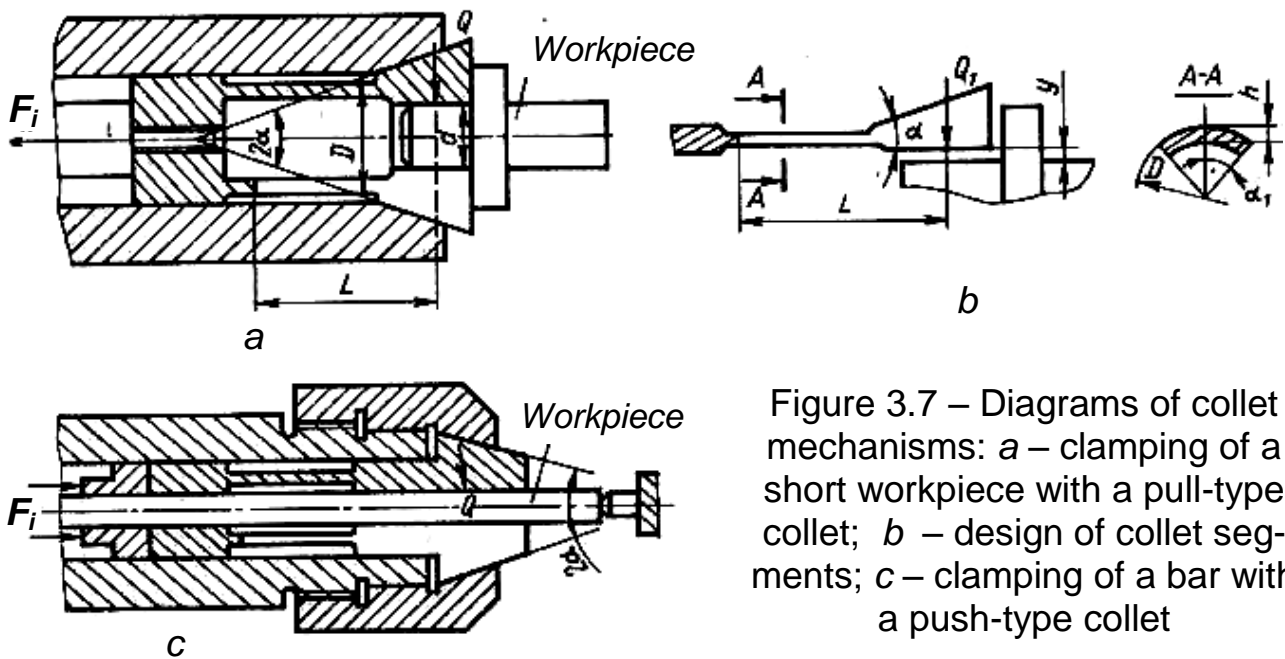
Diagrams of collet mechanisms: a – clamping of a short workpiece with a pull-type collet; b – design of collet segments; c – clamping of a bar with a push-type collet
